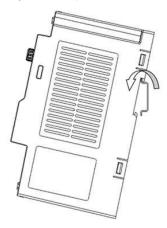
DIN rail mounting scenario 1 - Placing the DIN rail
